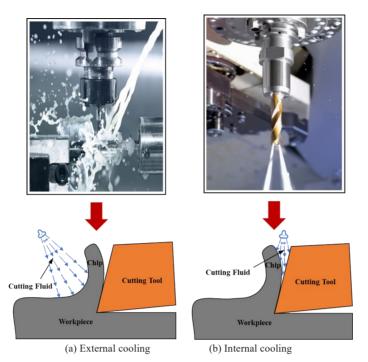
Cutting fluids supply under external and internal cooling techniques^{81,82}.
